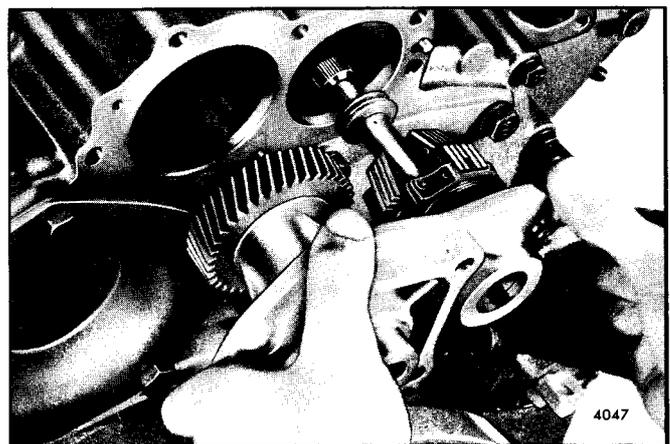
Removing/Installing Blower Drive Support (6V Engine)
